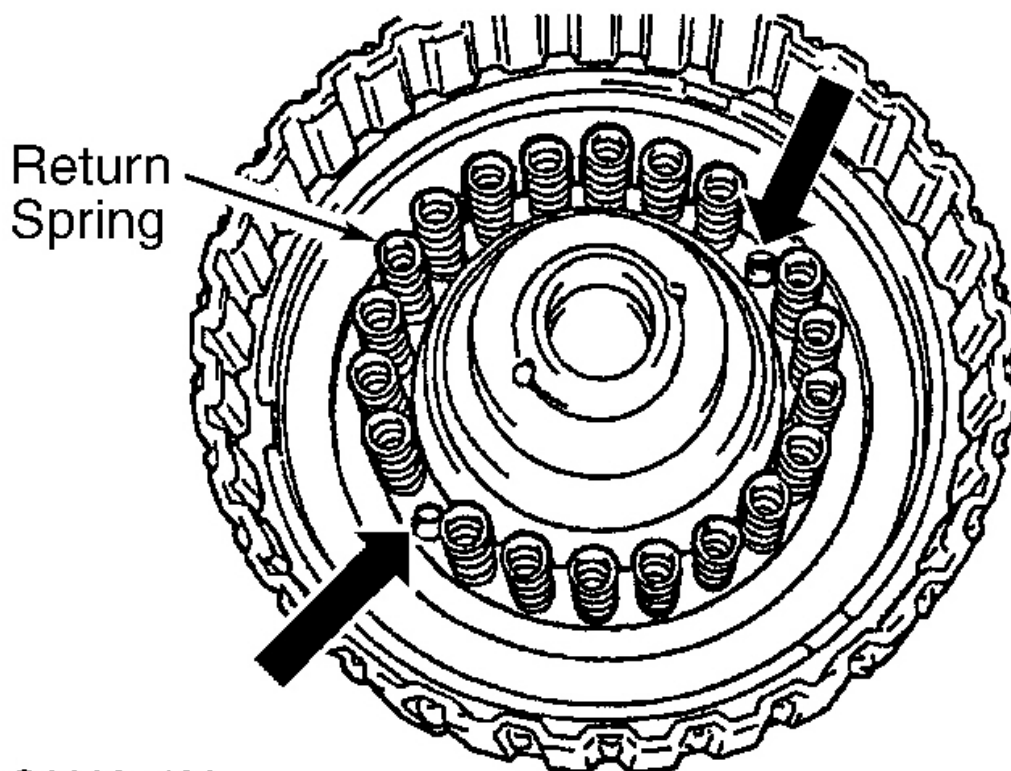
Aligning Reverse Clutch Piston & Retainer Outer Circumference Holes
